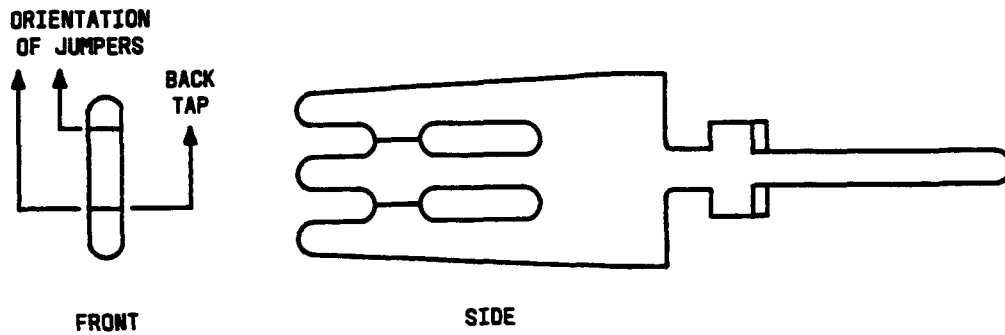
Views of Quick-Clip Terminal Used on 112-Type Connecting Block
